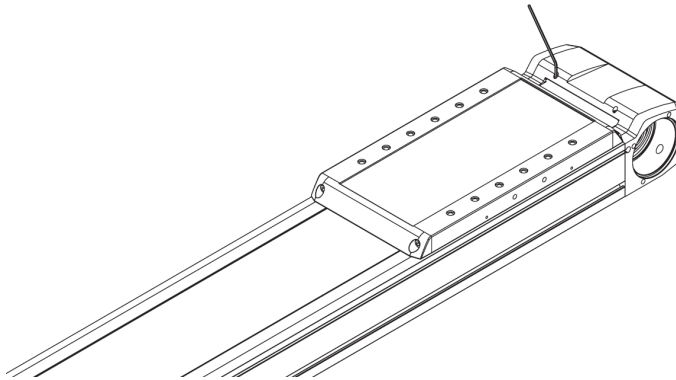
Disassembly/Assembly of the cover strip clamp for the HT-B
